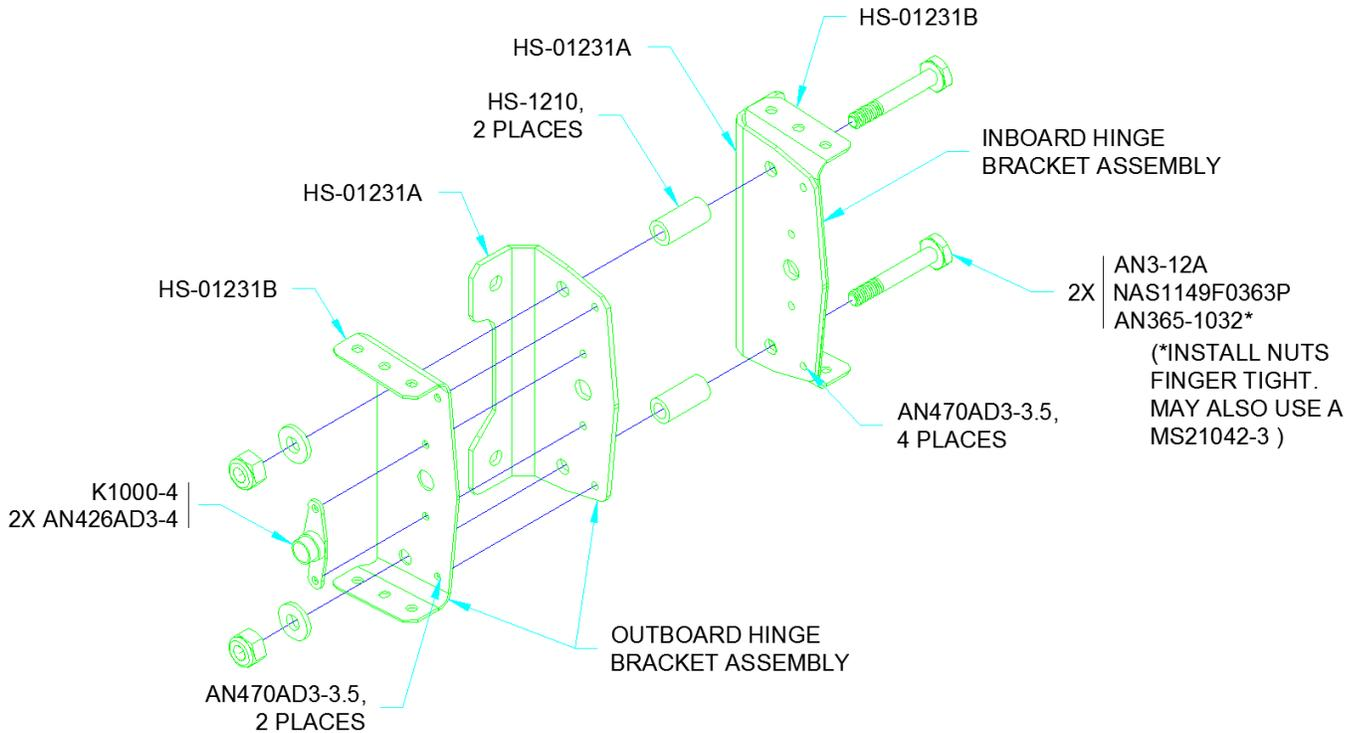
ASSEMBLING THE INBOARD AND OUTBOARD HINGE BRACKET ASSEMBLIES
